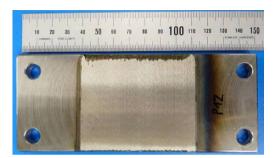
Grooved and subsequently laser cladded flat specimen after flat grinding (top: mm-scale ruler)
